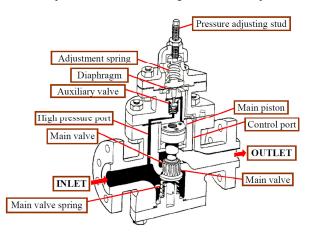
Analyzed steam pressure reduction valve intersection [9]
